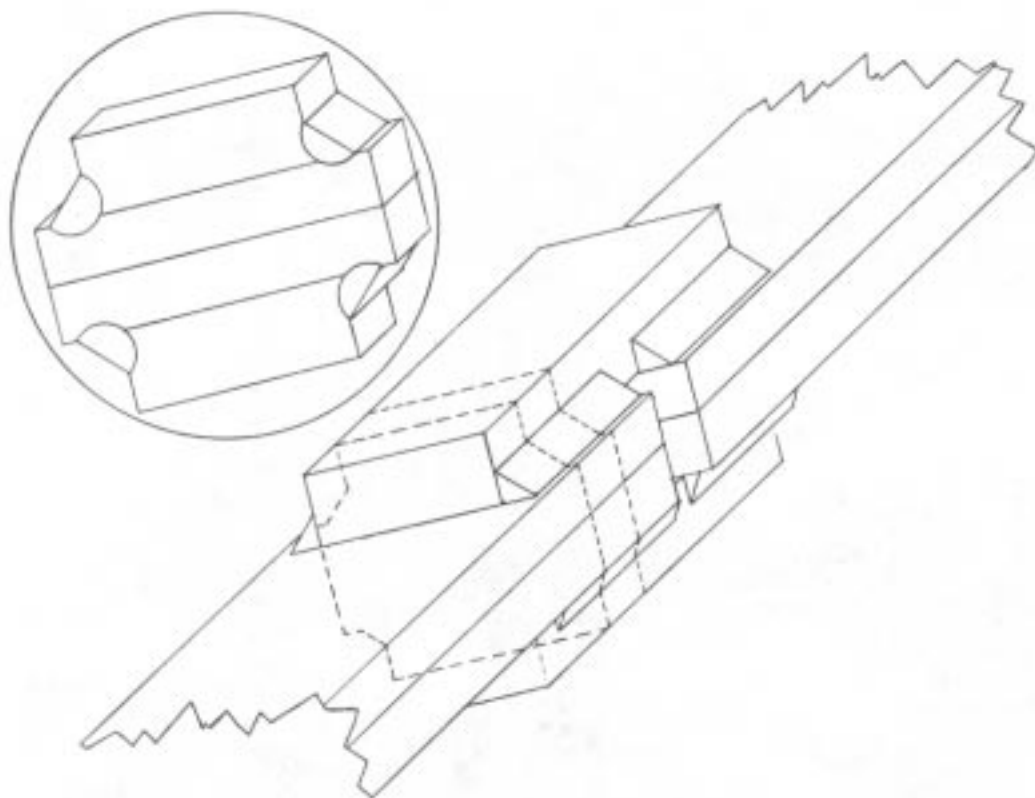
Typical Cross-Section Used For Macroetch of Longitudinal Fillet Weld Test Specimen
